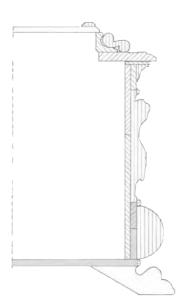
Sectional view of 7709-1861. Elements constructed in oak and chestnut are displayed in grey Drawing by Thomas Geissler
